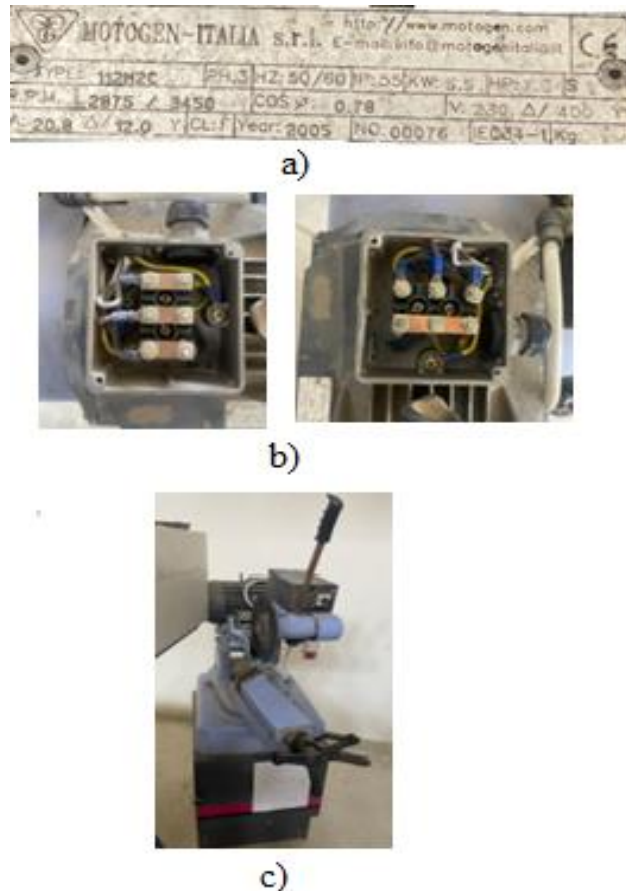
Disc Cutting a) Motor specifications and b) Delta and star motor connection c) Machine photography
